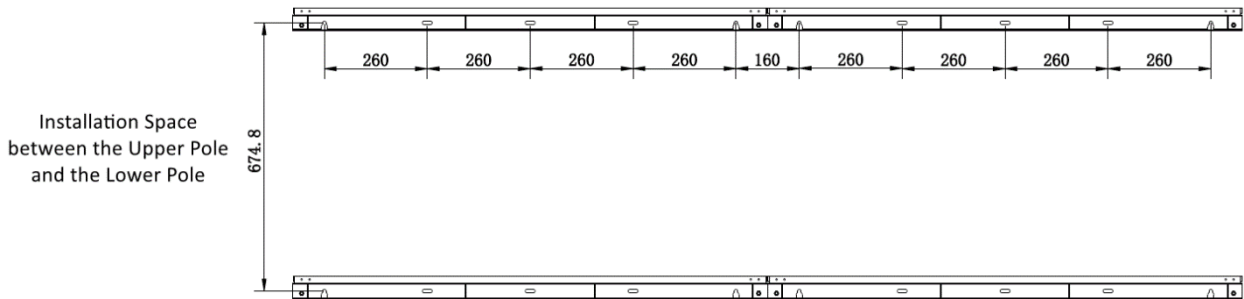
Wall-Mounted Bracket for 108-Inch Display
